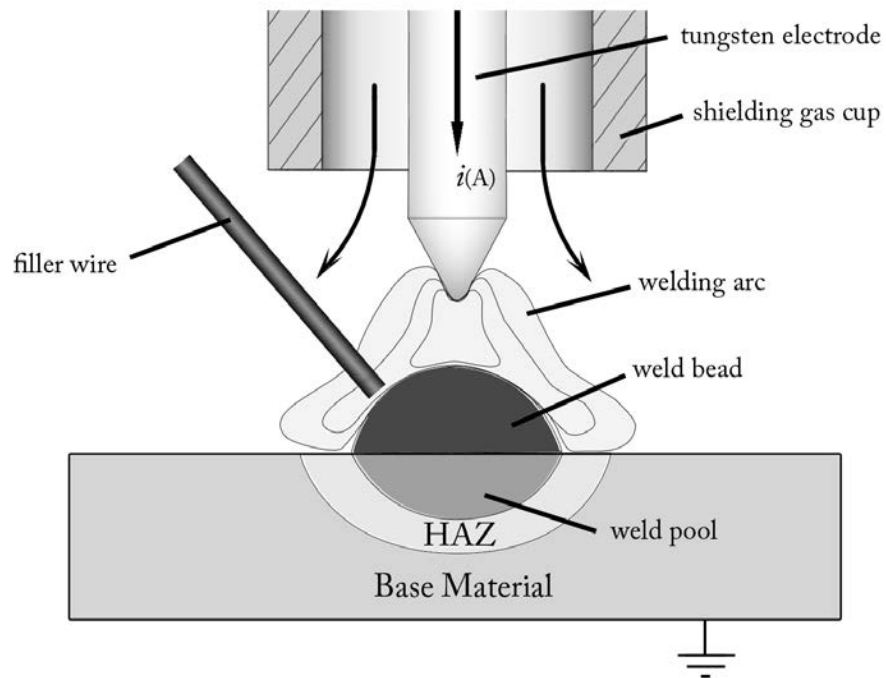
Schematic diagram of a transverse section of a cold-wire GTA weld bead
